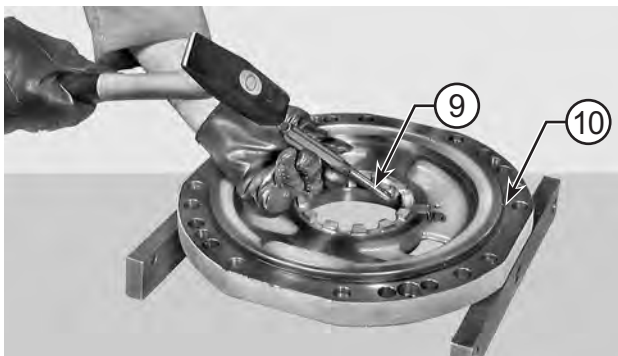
If bearings need replacing, remove the outer thrust blocks of bearings (9) from intermediate covers (4) and (8).
